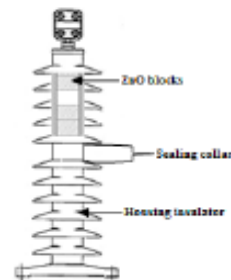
The cross-section drawing view of a polymer housed surge arrester
